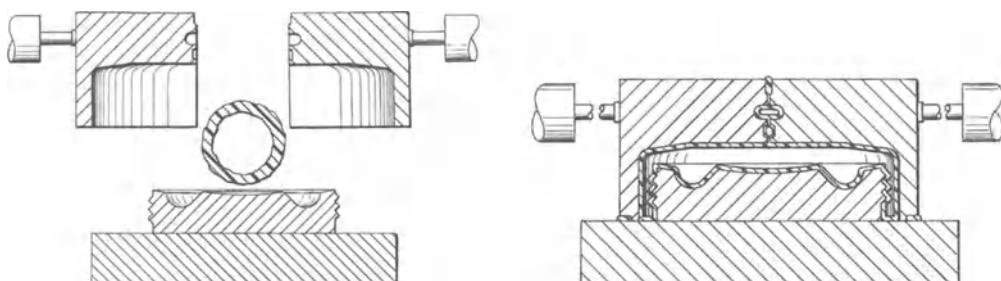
Example of a mold used in BM for a complex shape that includes threaded forming core. Views show the three-part mold in the open and closed positions with the blow pin located in the top two sections of the mold.
